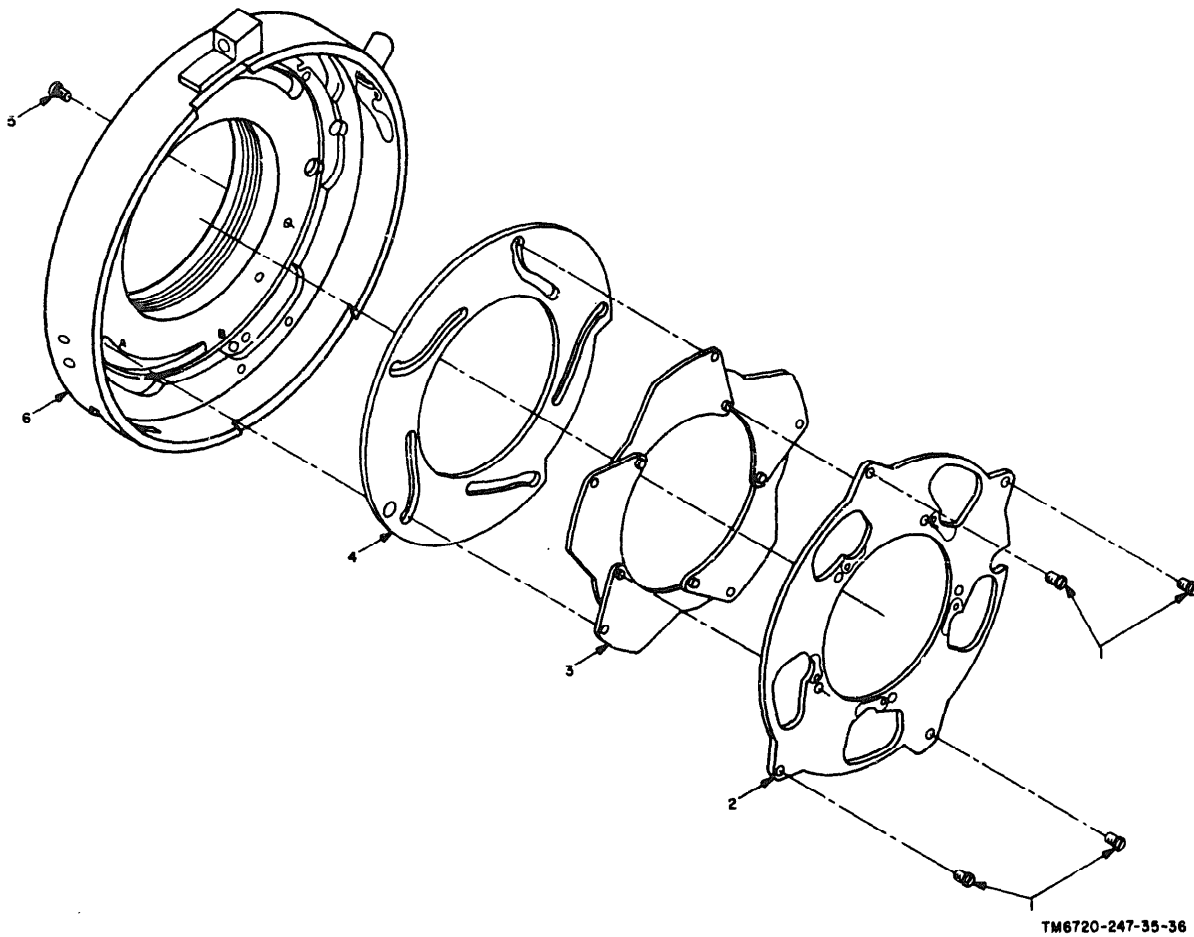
Lena and shutter, disassembly (stage 5), exploded view.
